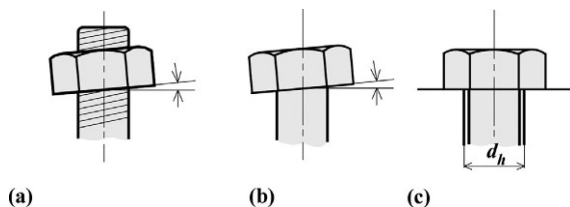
Parallelism of nut- and bolt head-bearing surfaces and bolt hole diameter. (A) Nut bearing surface, (B) bolt head bearing surface, and (C) bolt hole diameter.
